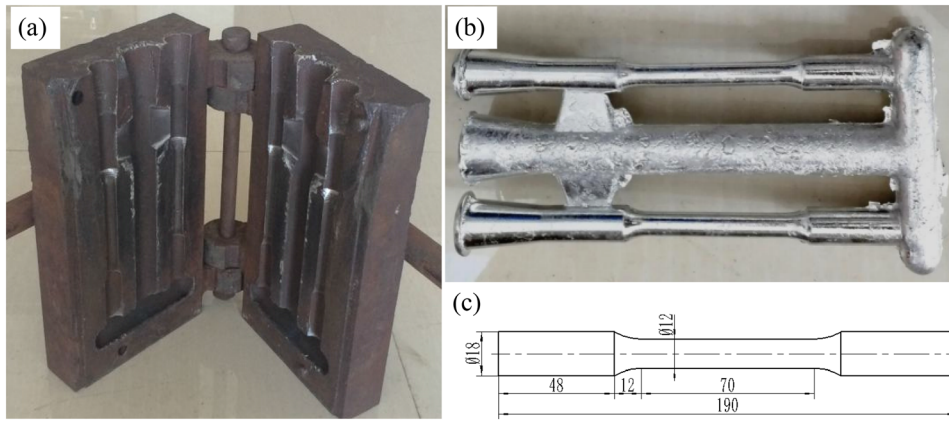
The permanent steel mould (a) and the castings+gating system for the cast tensile rod (b), and the dimensions of tensile specimen (c).
